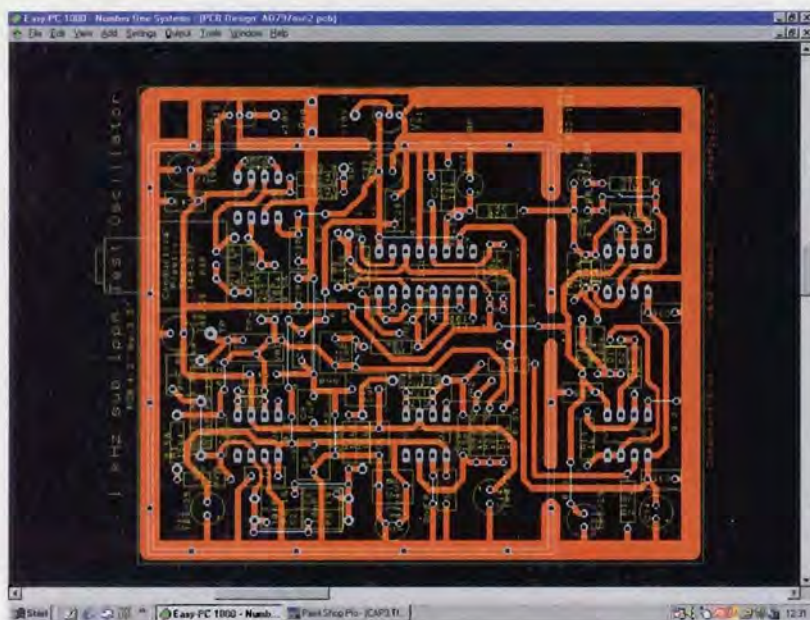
Version II of the PCB design, as used for this article. The board can be assembled using a variety of oscillator ICs, and is pierced allowing a choice of oscillator capacitor styles and values. The PCB tracks have been arranged for easy one-off PCB etching and assembly.
